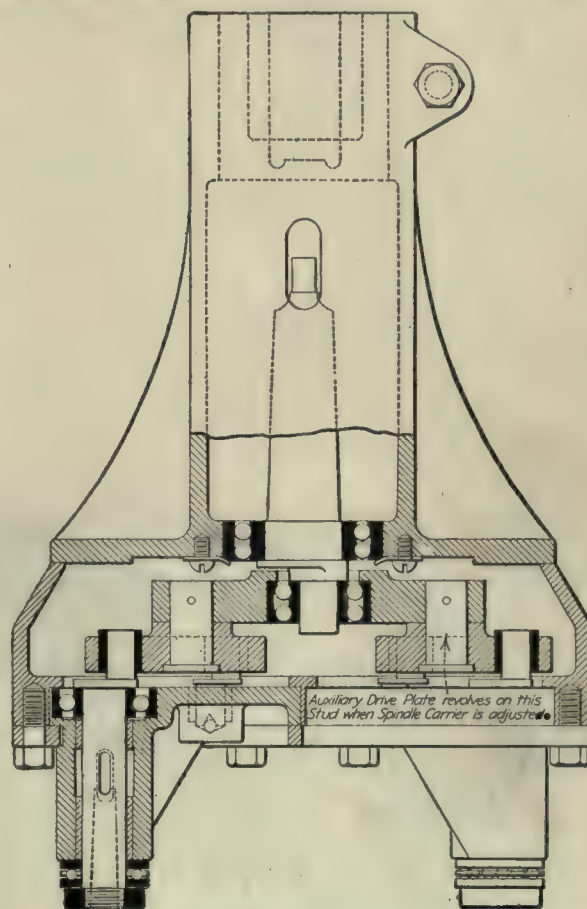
SECTIONAL VIEW OF THE ADJUSTABLE-CENTER HEAD SHOWING THE CONSTRUCTION
